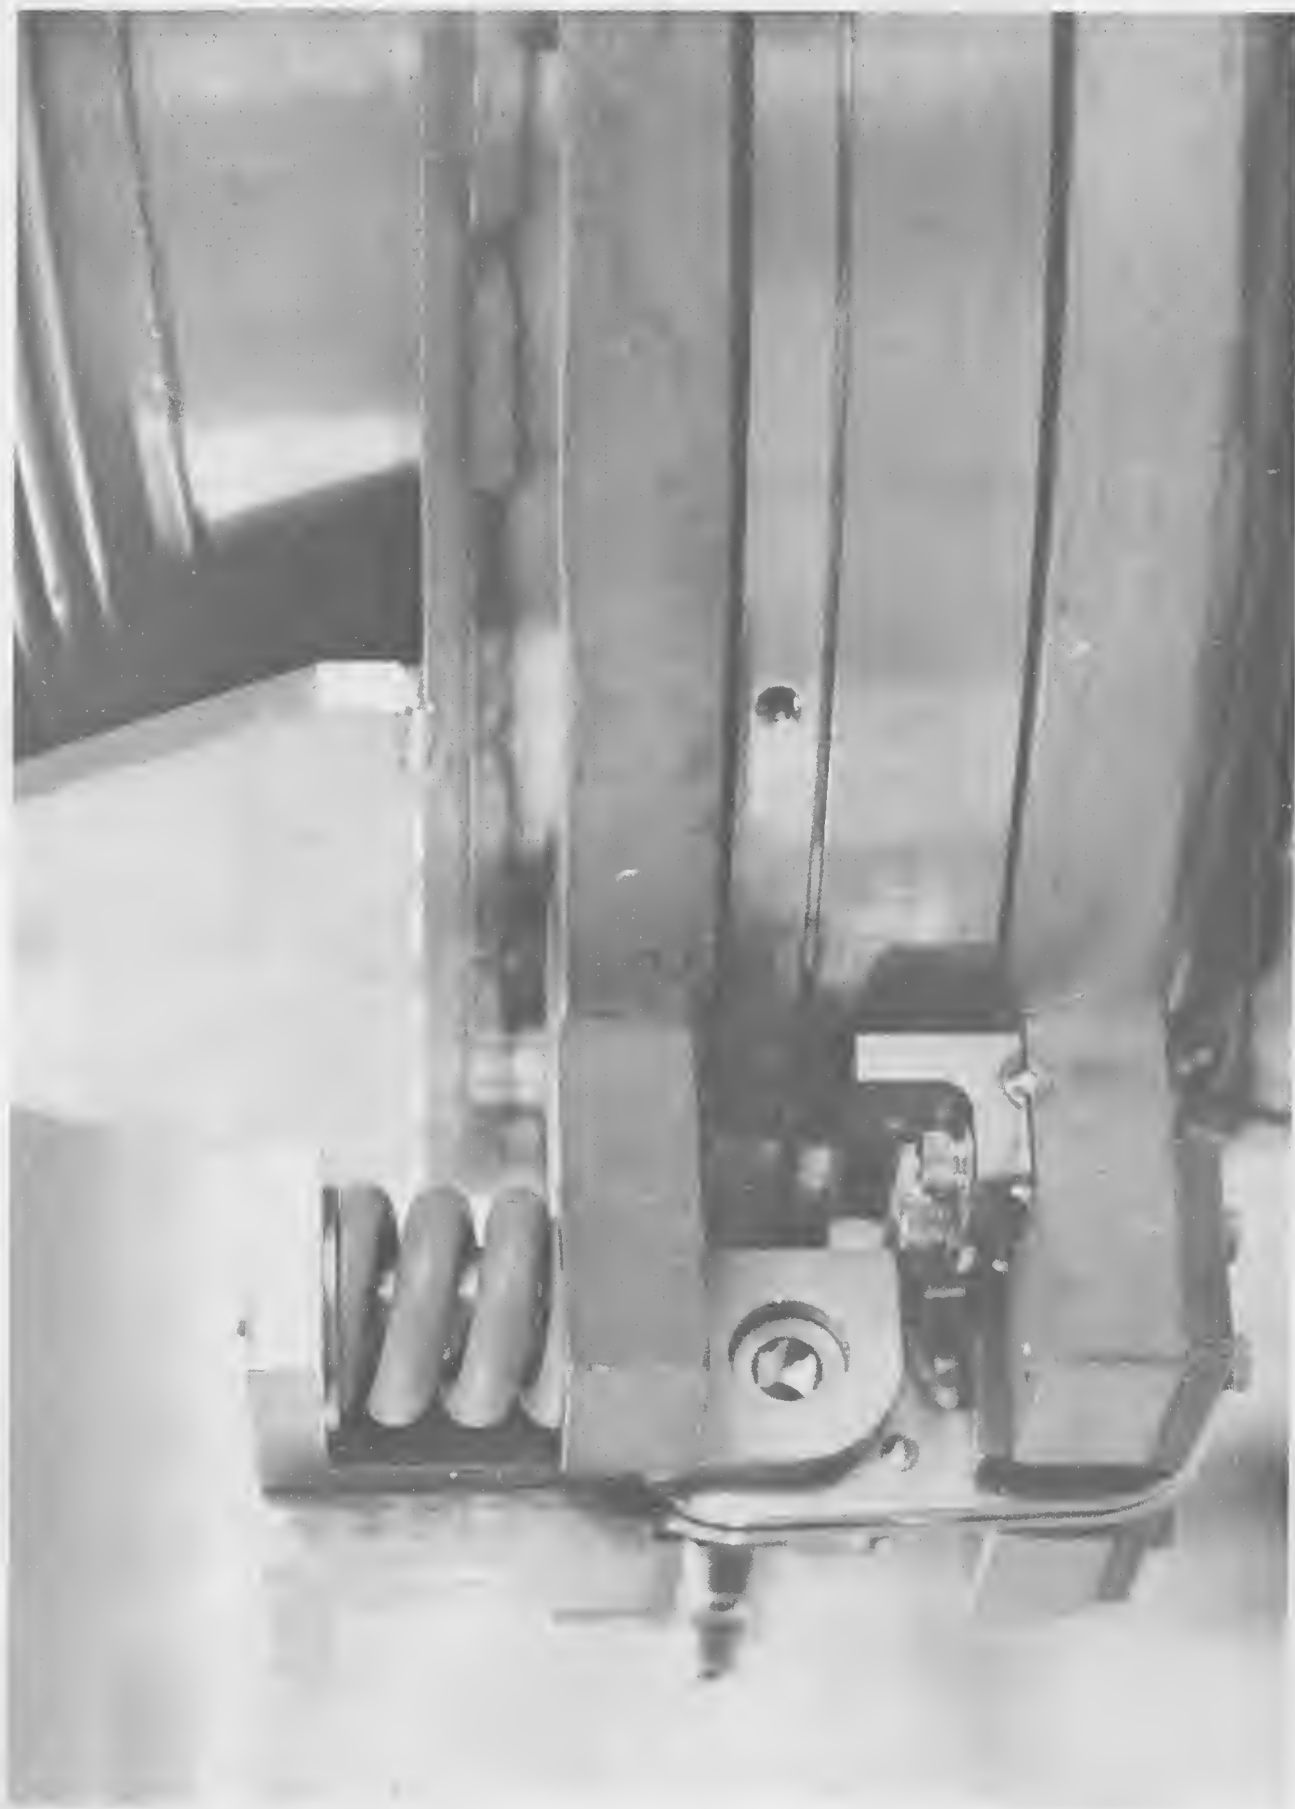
Coupling. Cammed Hooks Compress Coil Springs which Load Ring-Springs. The Male Flange is the Thicker of the Two Flanges.
